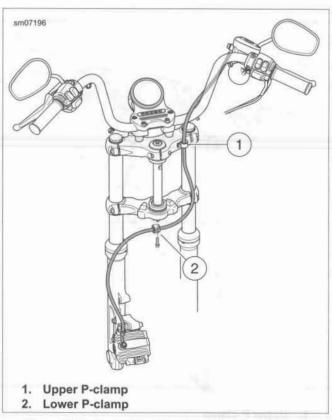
Brake Line Routing: XL 1200V/CP/CB w/Mini-Ape
